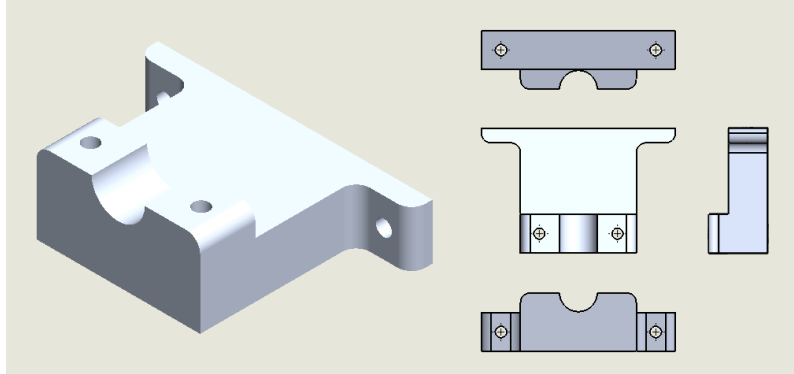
SolidWorks CAD drawing of the actuator housing support connected to the 80 / 20 structural frame. Left: support isometric view. Right: support front, top, back, and lateral view.
